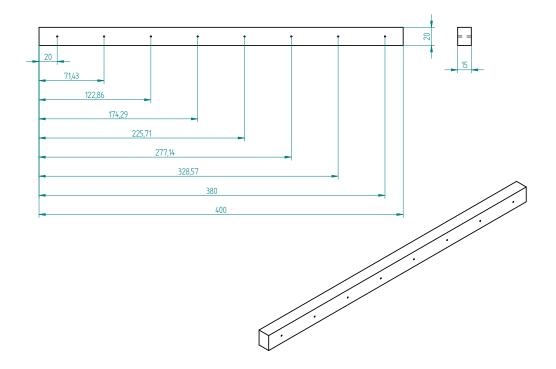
Shaped part : guide for perpendiculator tool
